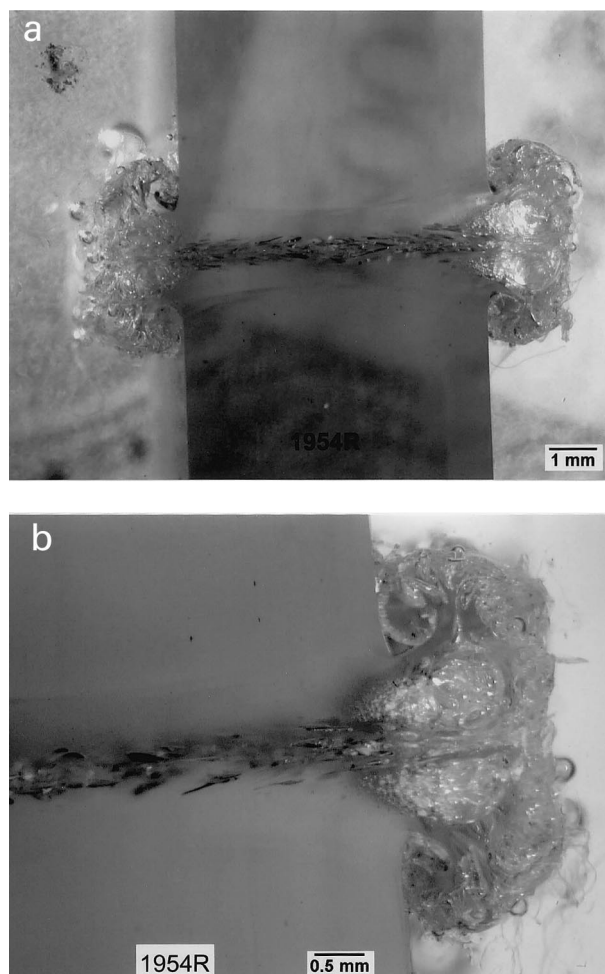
Macrograph of weld zone in a 6.2-mm thick specimen welded at a hot-tool temperature of 380°C, a melt time of 20 s, melt and weld penetrations of 0.13 and 0.66 mm, respectively, and a seal time of 10 s. (a) Full view of HAZ and weld bead. (b) Close up showing bubbles in the HAZ core and detailed structure of bead.
